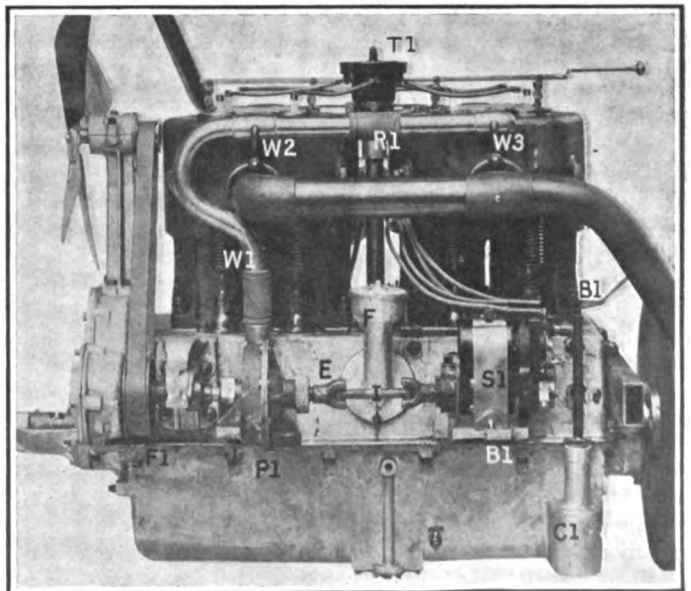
View of the exhaust side of the motor, showing magneto, water pump, oil filler hole and cork-float indicator housing
